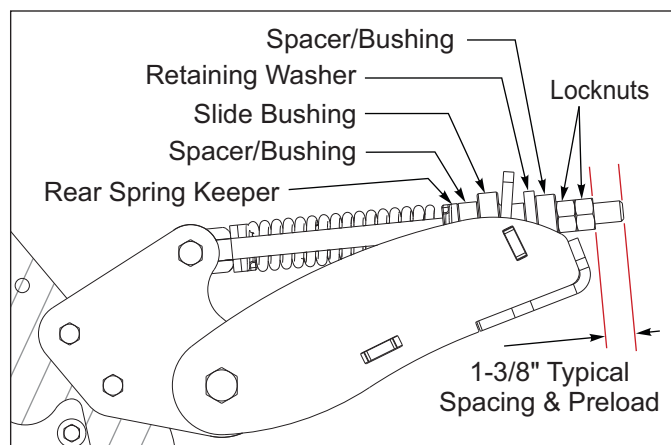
Closer Platform Spring Setup (02/2022 TO 04/2024)
